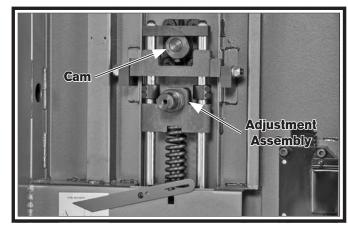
Lubrication locations for tension adjustment assembly (wheel removed for clarity).
